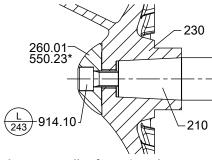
Impeller fastening elements, sizes 700-330, 800-400, 800-401
